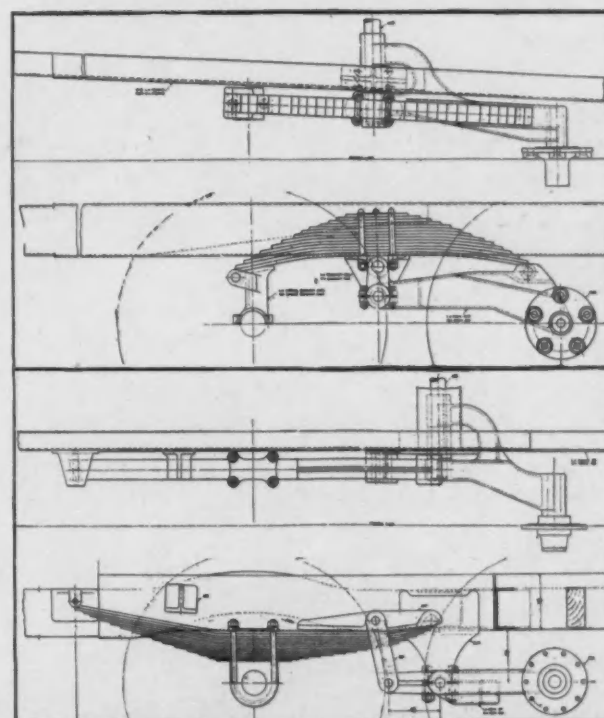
THE F & F SIX-WHEEL ATTACHMENT AND FRAME EXTENSION FOR FORD AA TRUCKS EMBODIES TWO-STAGE SPRING SUSPENSION, A LOWER SPRING ATTACHING TO BOTH AXLES TO TAKE LIGHT LOADS AND AN UPPER HEAVY AUXILIARY SPRING WHICH COMES INTO PLAY AS THE LOAD INCREASES. THE DRIVE AXLE CARRIES 60 PER CENT OF THE WEIGHT. THE SPRINGS ARE U-BOLTED TOGETHER AND TRUNNION-MOUNTED ON A CROSS-BAR, WHICH IS CARRIED IN A BRACKET EXTENDING DOWN FROM THE CHASSIS FRAME. THE BRACKET WHICH ATTACHES THE DEAD AXLE TO THE LOWER SPRING PROVIDES SLIGHT SIDEWISE MOVEMENT FOR TRACKING AND UNIVERSAL ACTION TO ACCOMMODATE TWIST
